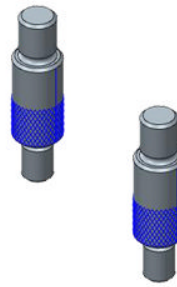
Bolt 3282/29 (1 set = 2 pieces)
